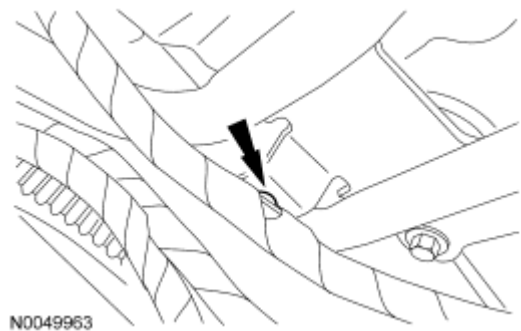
Detaching Wiring Harness Pin-Type Retainer From Coolant Tube Assembly Bracket
